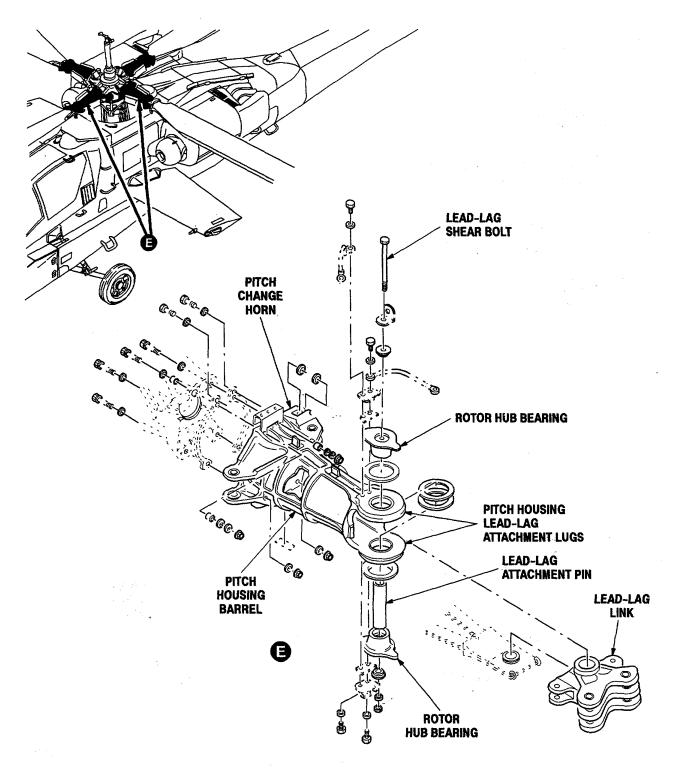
Main Rotor Subsystem Component Location (Sheet 4 of 6)
